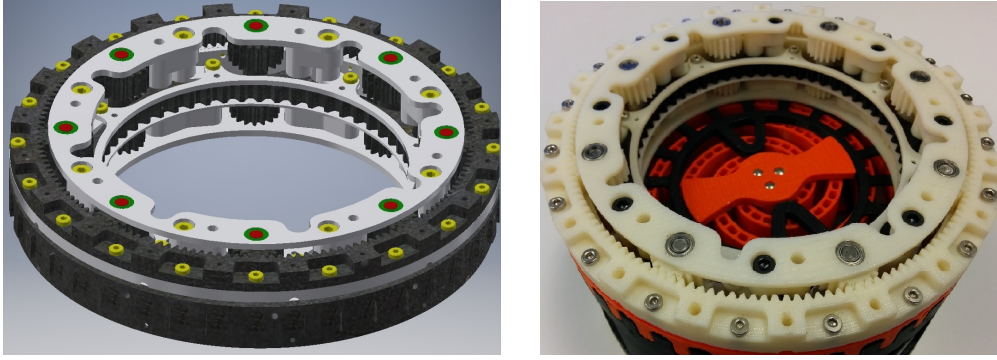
Example gearbox design without a sun gear. Left: CAD rendering. Right: 3D printed joint prototype that features the gearbox.
